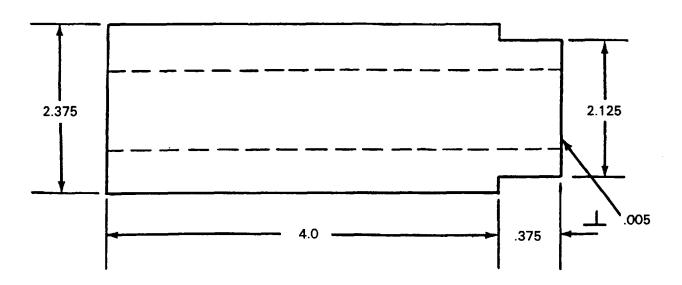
Hydraulic Piston Pump - Driveshaft/Pup Housing Bearing Installation Tool
